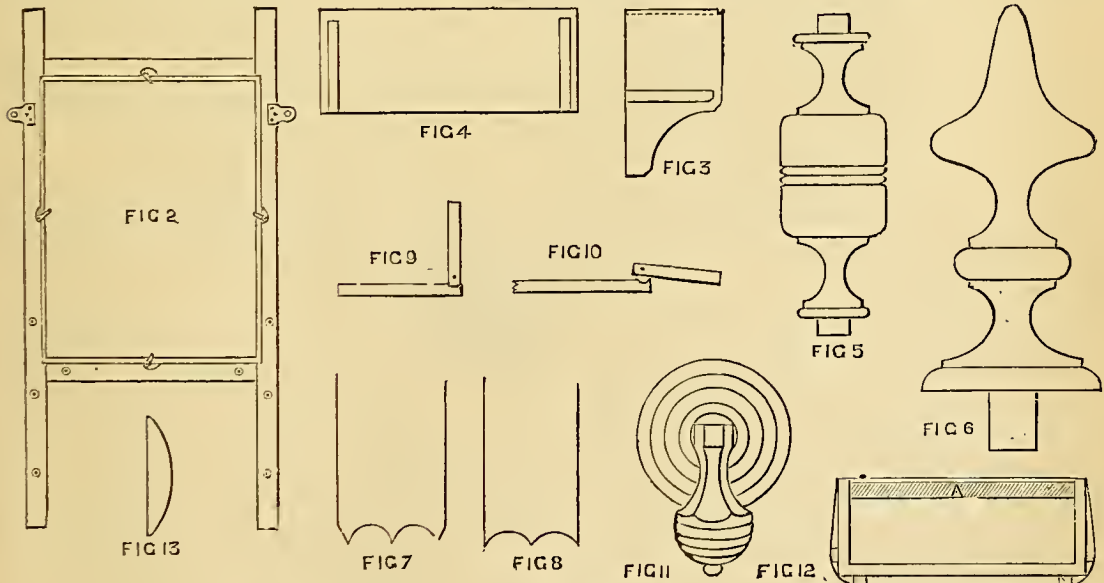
BACK OF FRAME; Scale, 1 inch to 1 foot. FIG. 3.—BRACKET FOR BOX PART; Scale, 1 inch to 1 foot. FIG. 4.—TOP OF BOX, UNDER SIDE; Scale, 1 inch to 1 foot. FIG. 5.—SPINDLES; Full size. FIG. 6.—ORNAMENT ON TOP OF UPRIGHTS; Full size. FIGS. 7 AND 8.—BLADES FOR ROUTER; Full size. FIGS. 9 AND 10.—DIAGRAMS REPRESENTING WORKING OF DOOR. FIG. 11.—SMALL BRASS DROP HANDLE; Full size. FIG. 12.—METHOD OF CLOSING MITRE JOINTS OF MOULDINGS. FIG. 13.—SECTION OF BUTTON.
